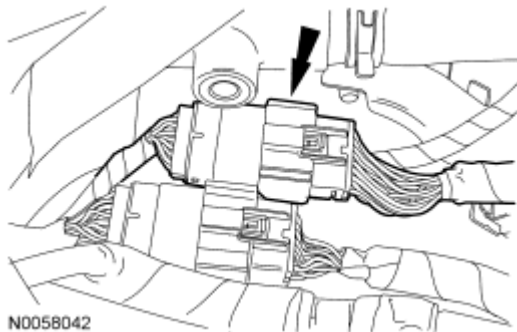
Locating Transmission Connector Wire Harness Pin-Type Retainer
